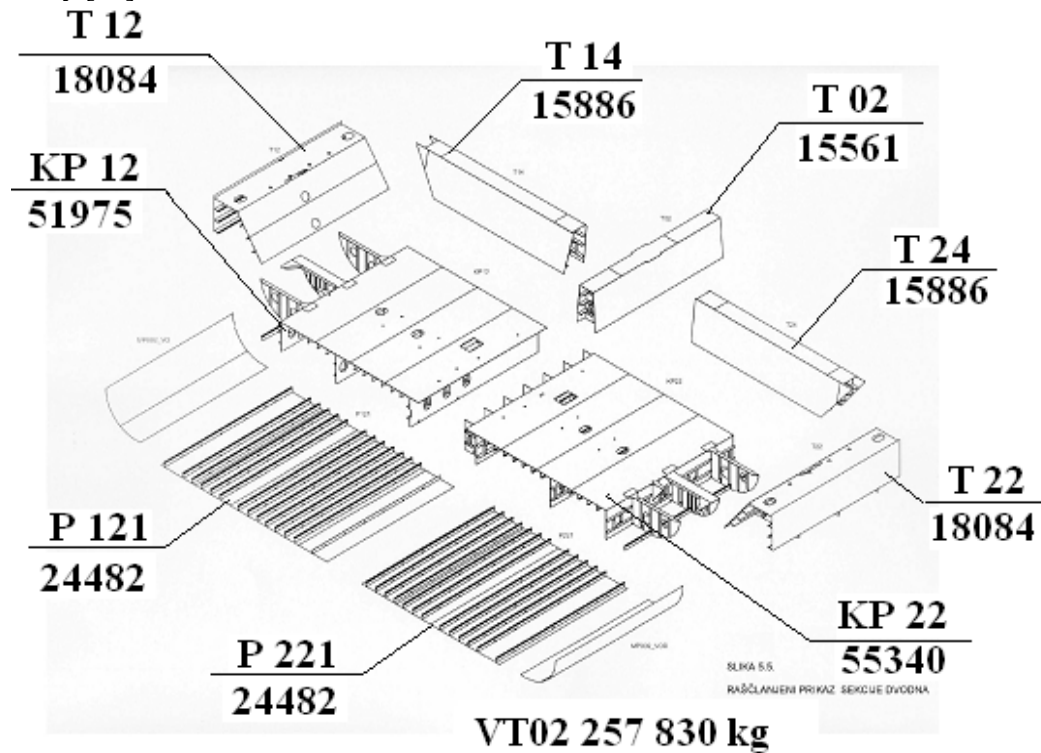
Panels and built-up panels of the Chemical tanker double bottom block [30]
